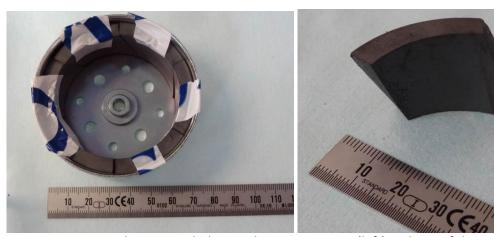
Pictures showing a whole sample cut in six parts (left) and one of these parts (right).
